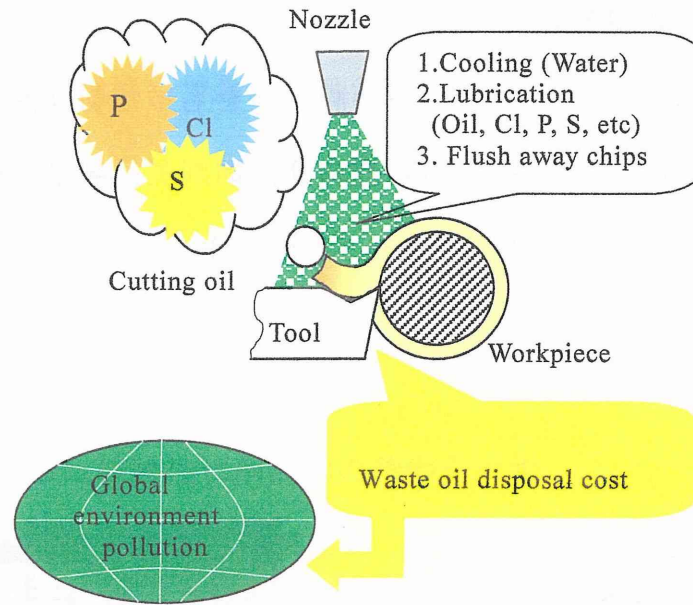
Traditional cutting work using large amount of cutting oil.
